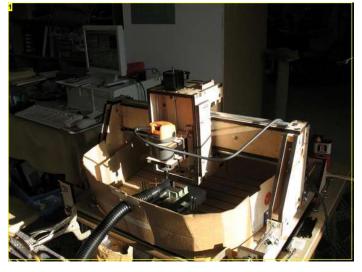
Photo 2 - Angry Monk's Finished Machine.
